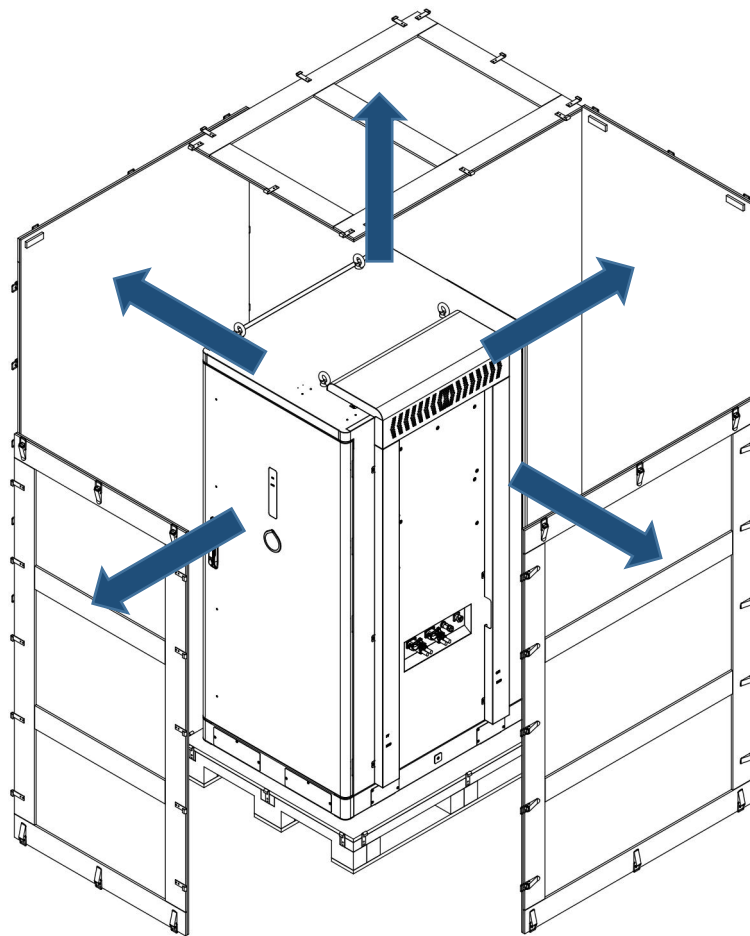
Wooden crate assembly and disassembly diagram
